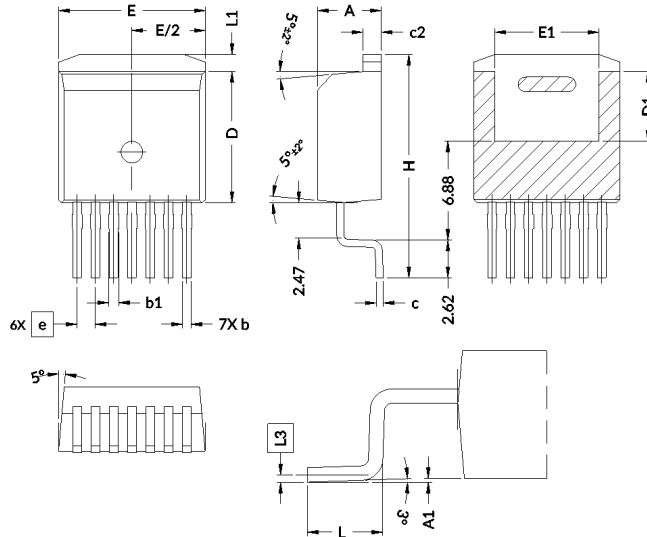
D2PAK-7L (TO-263-7L) Package Outline Drawing
